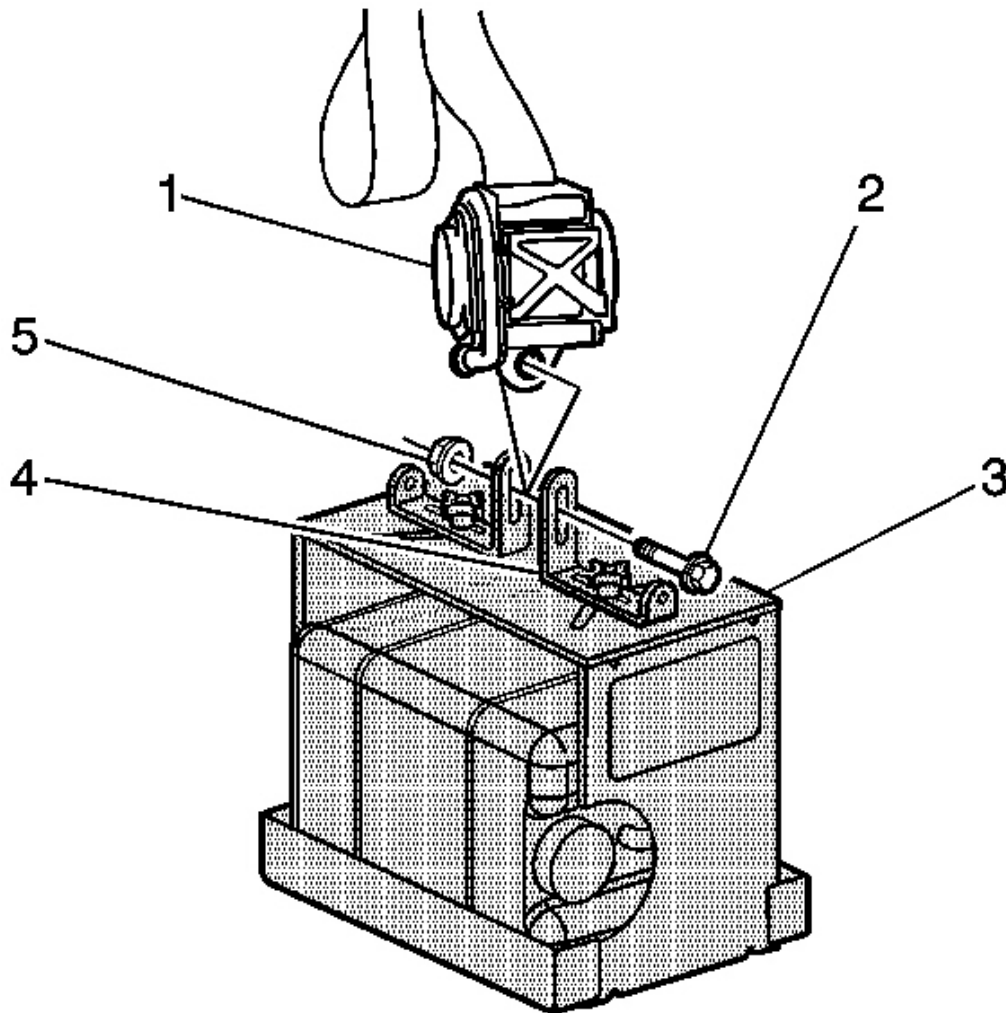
Seat Belt Pretensioner And SIR Deployment Fixture
